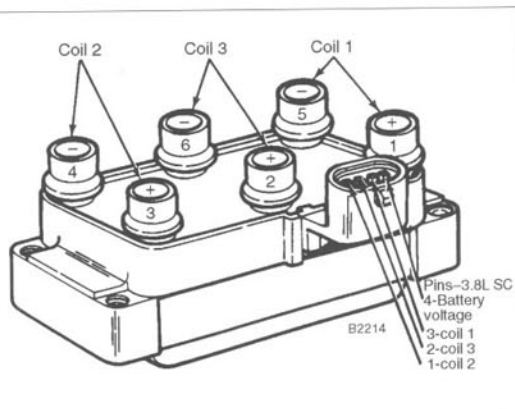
DIS coil pack replaces distributor and coil. Three coils fire six cylinders of 3.0L and 3.8L engines.
